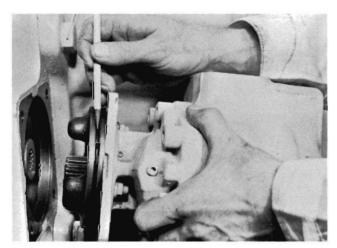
Install new "O" Ring on pump adaptor. Install pumps or pump hole cover plates.
